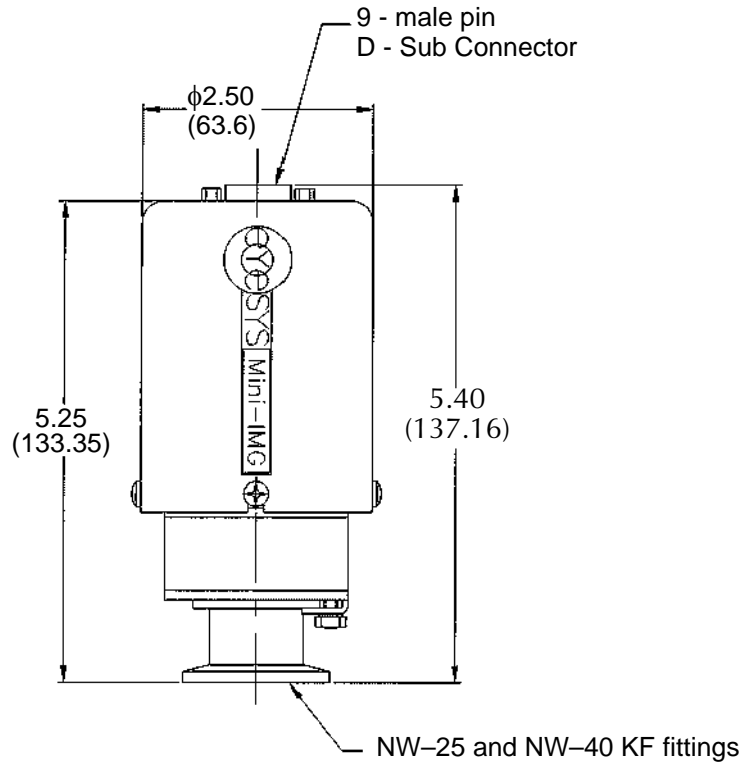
Eyesys Mini-IMG Gauge Controller Dimensions
